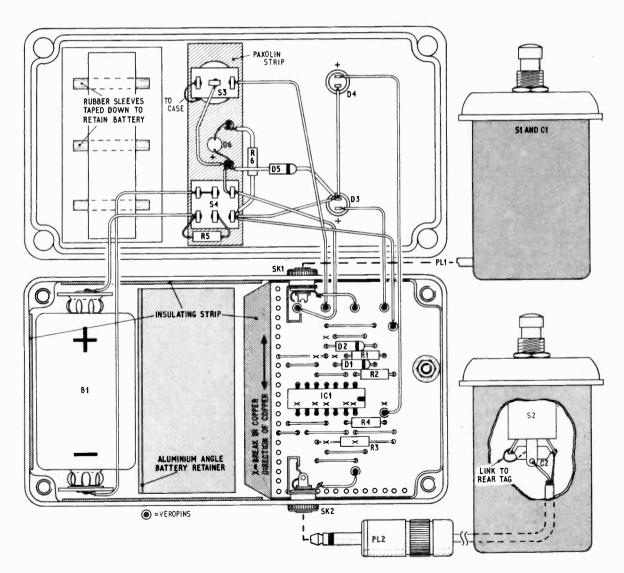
Layout of the components on the Veroboard and front panel, and interwiring details
